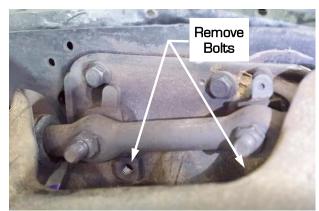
Remove Lower Upper Control Arm Bracket Bolts
